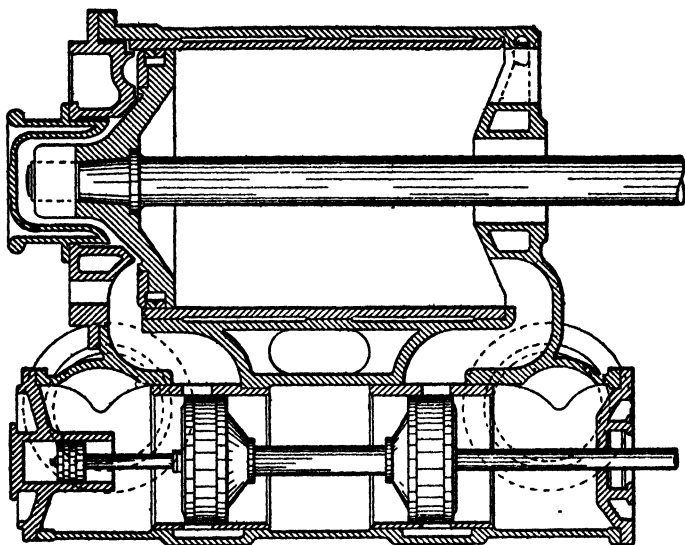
Section of Piston Valve and High-Pressure Cylinder of U. S. S. "Massachusetts" Showing Method of Balancing
